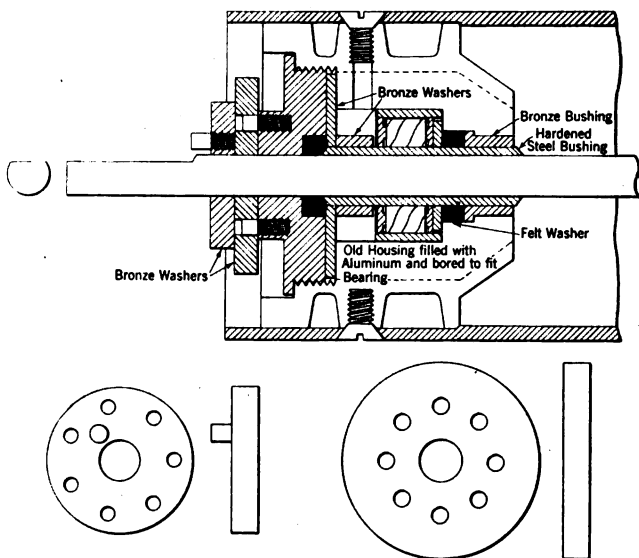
ORIGINAL HOUSING MODIFIED AND FITTED WITH ROLLER BEARING
